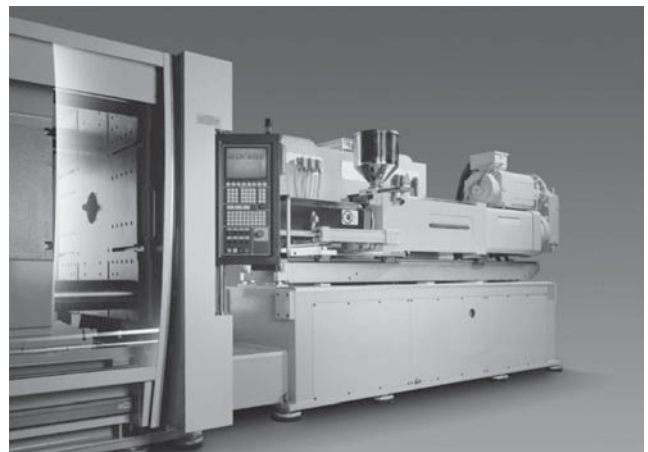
Electric screw drive and hydraulic toggle clamp are the main features of the machine shown. (Photo courtesy of Negri Bossi.)
